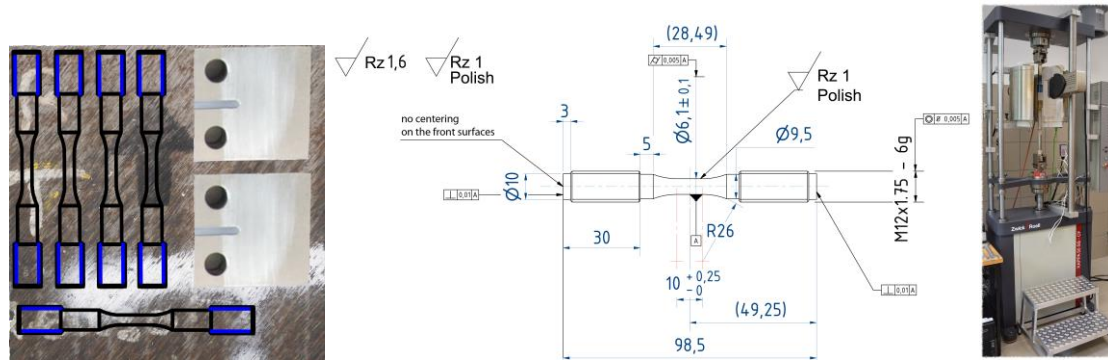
Cutting plan of block P91, the shape and dimensions of specimen and testing machine Kappa SS-CF
